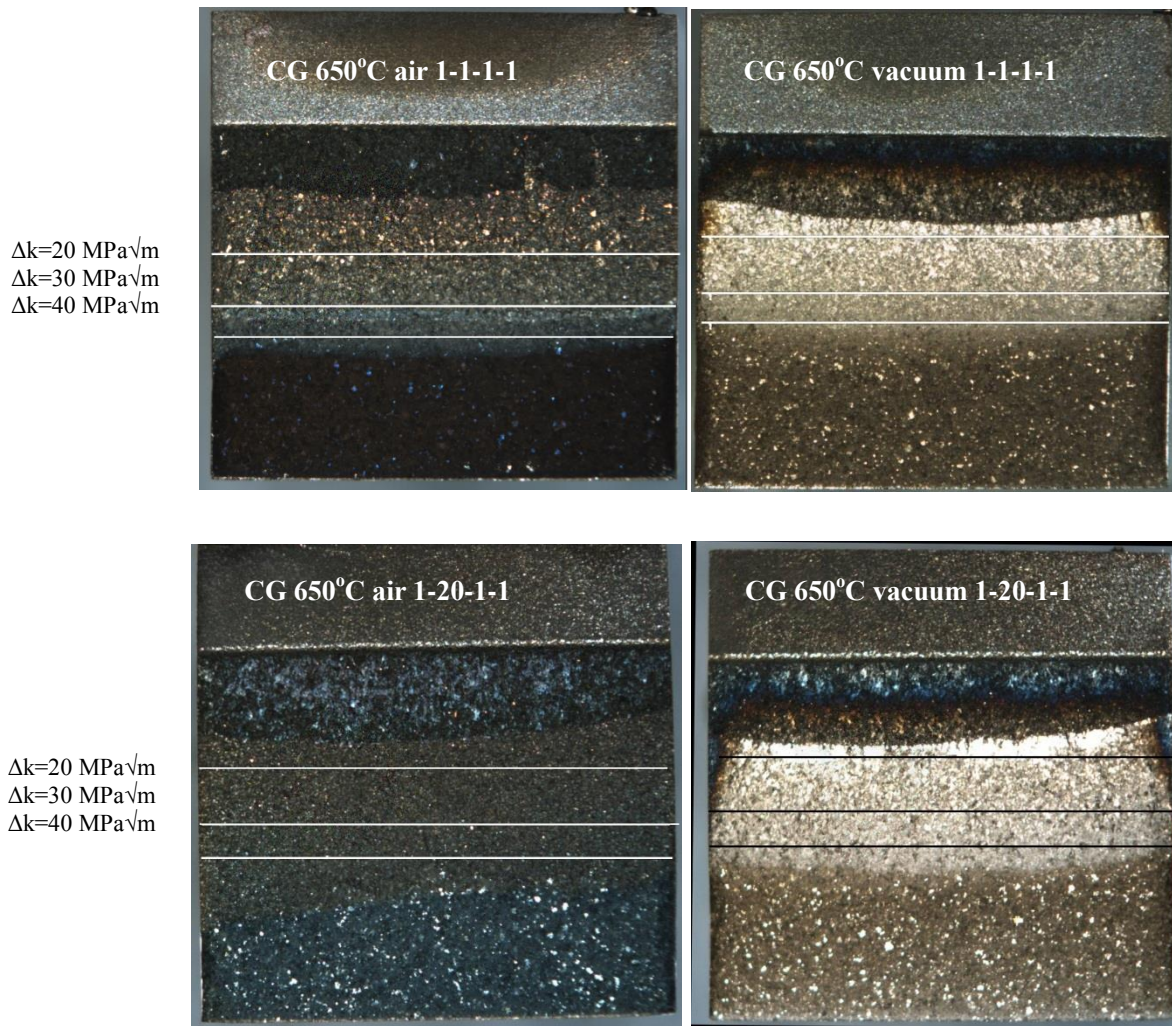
Optical overview of fracture surface of the CG LSHR alloy tested at 650 °C.
